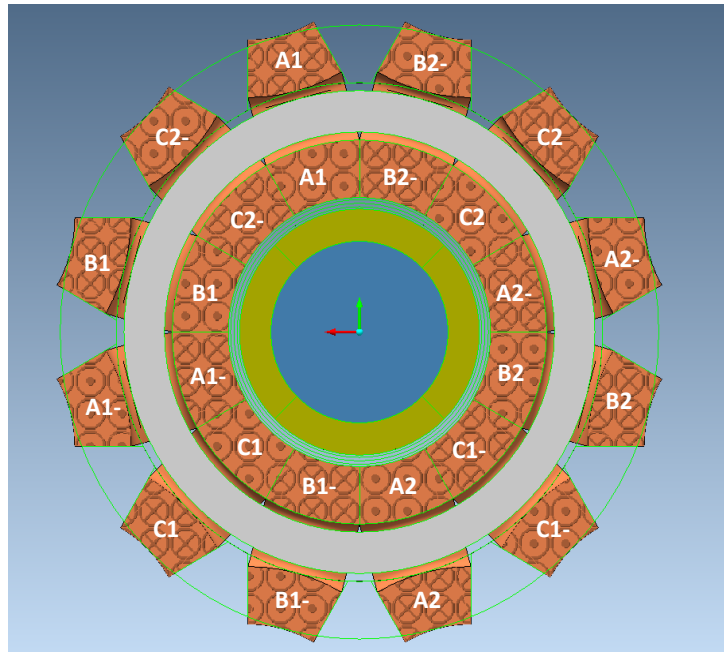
A cross-section view of the designed motor with labelled winding coils
